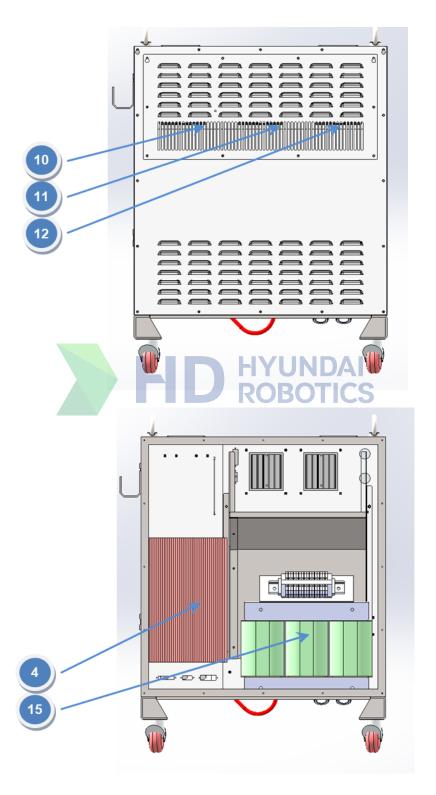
Placement of Parts on the Back of the Hi6-S30/S50-A0 Controller
